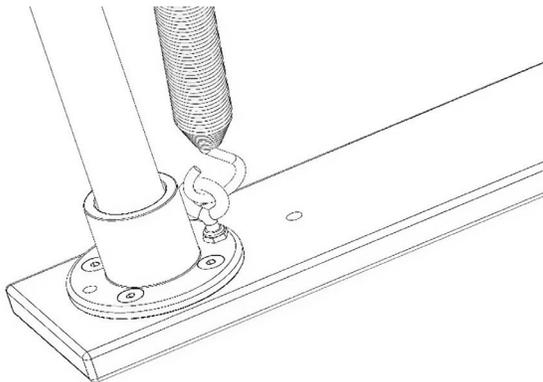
Figure E. Picture of open hook-on spring inserted through the eyebolts on floor plate.
